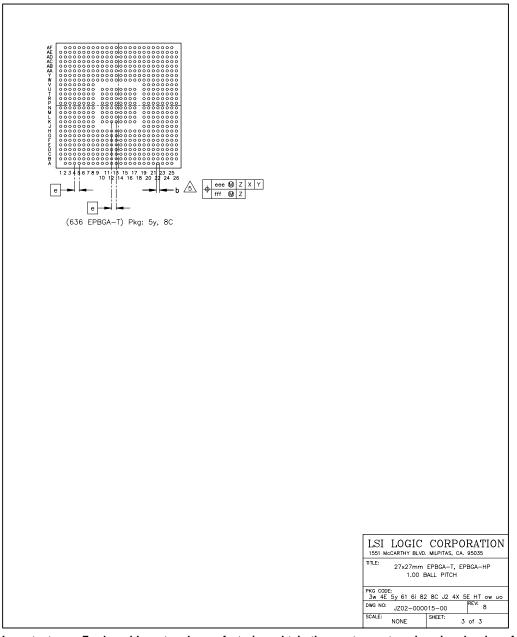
JZ02-000015-00 (5Y) Mechanical Drawing; Bottom View (Sheet 3 of 3)
